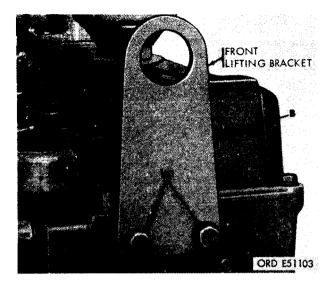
REMOVING OR INSTALLING ENGINE FRONT LIFTING BRACKET.
